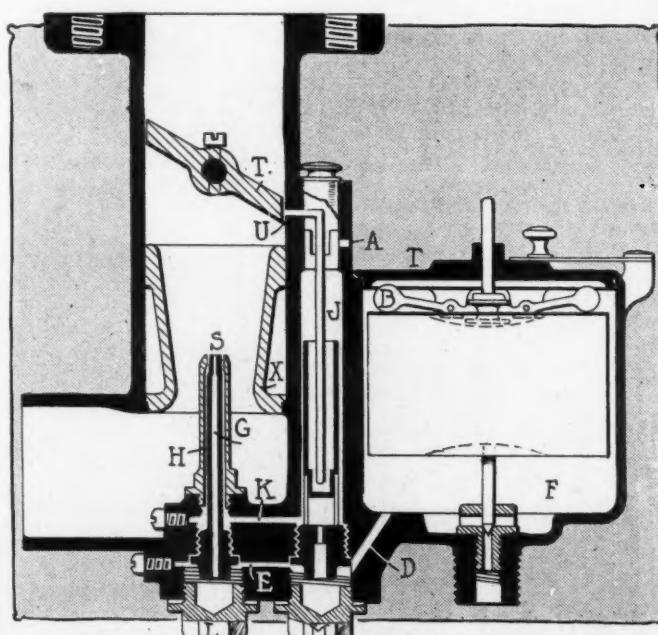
Zenith carburetor employs auxiliary jet at butterfly valve edge
